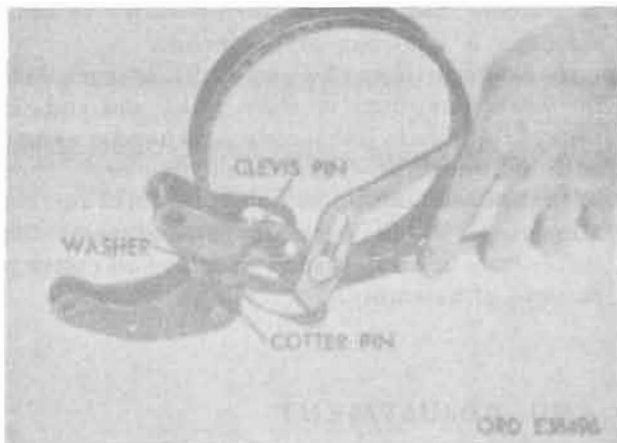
Support assembly clevis pin, washer, and cotter pin.
